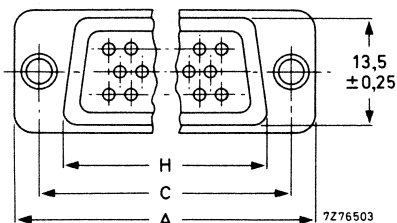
Terminal side of pin (or socket) connector; see also Table 6.
